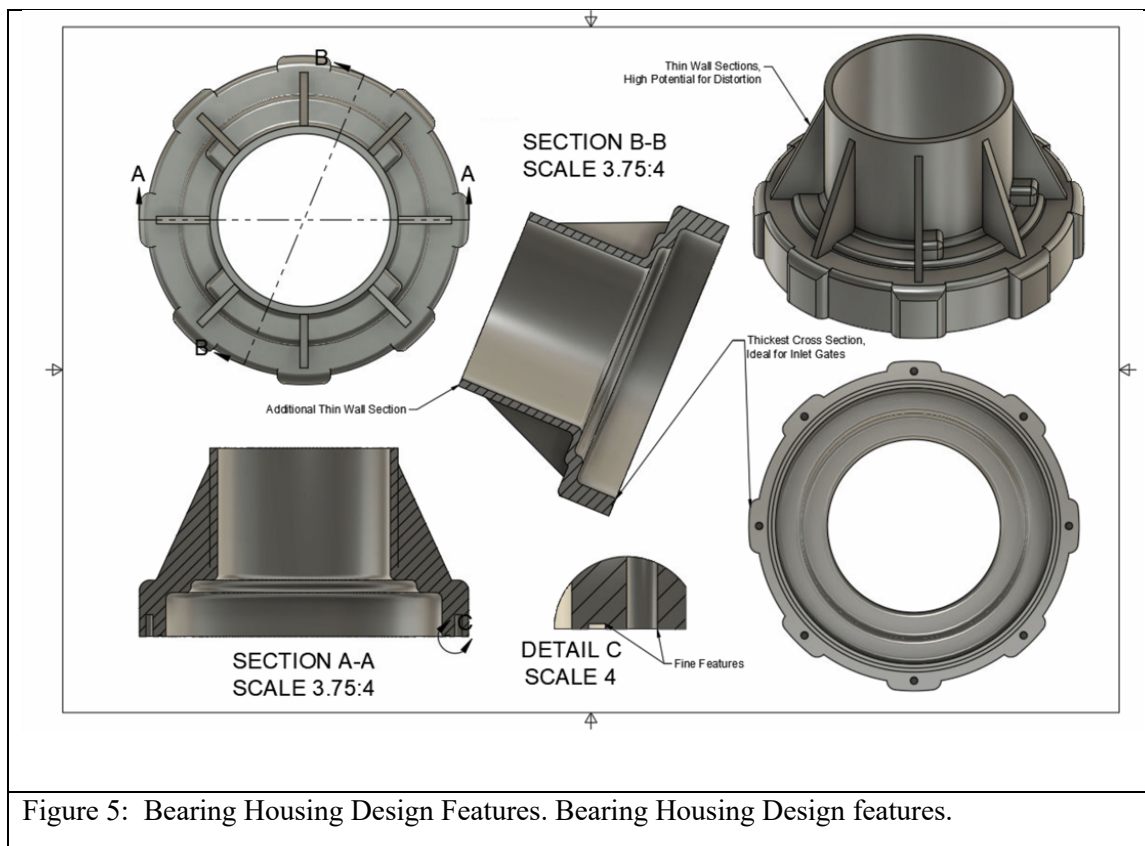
Bearing Housing Design Features. Bearing Housing Design features.
